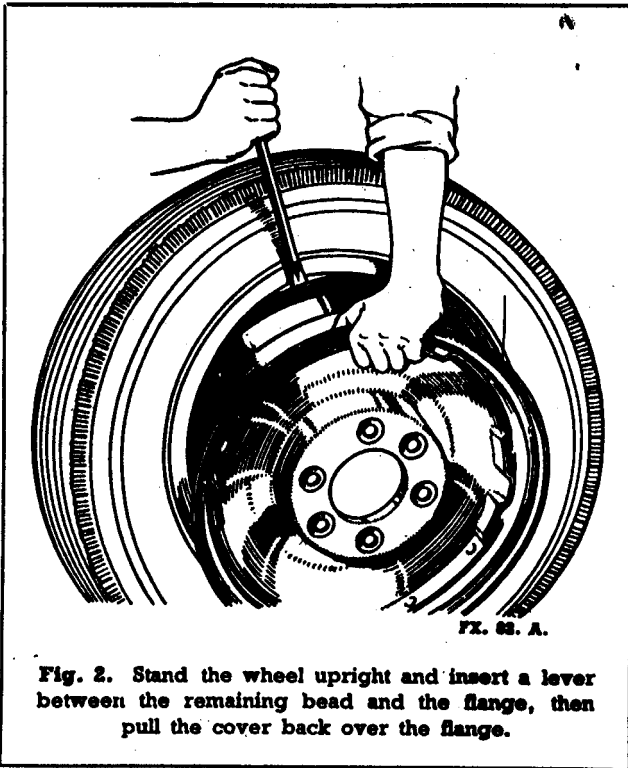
Stand the wheel upright and insert a lever between the remaining bead and the flange, then pull the cover back over the flange.
